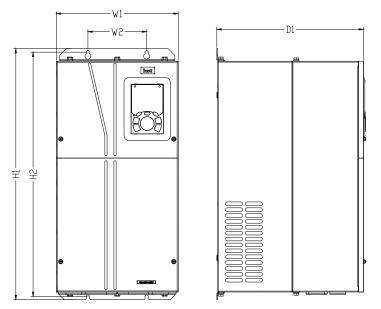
Wall installation diagram of VFDs of 220V 18.5–55kW and 460V 37–55kW
